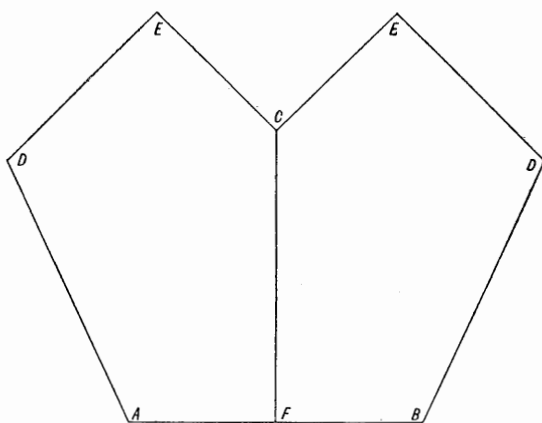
An Elevation, or a Section of a Two Pronged Fitting.
